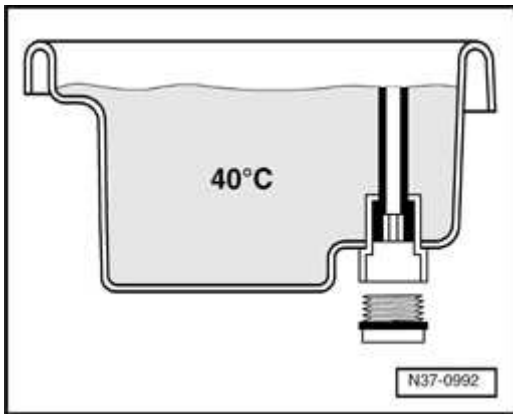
Example Of Filler Tube As It Is Installed In Transmissions
